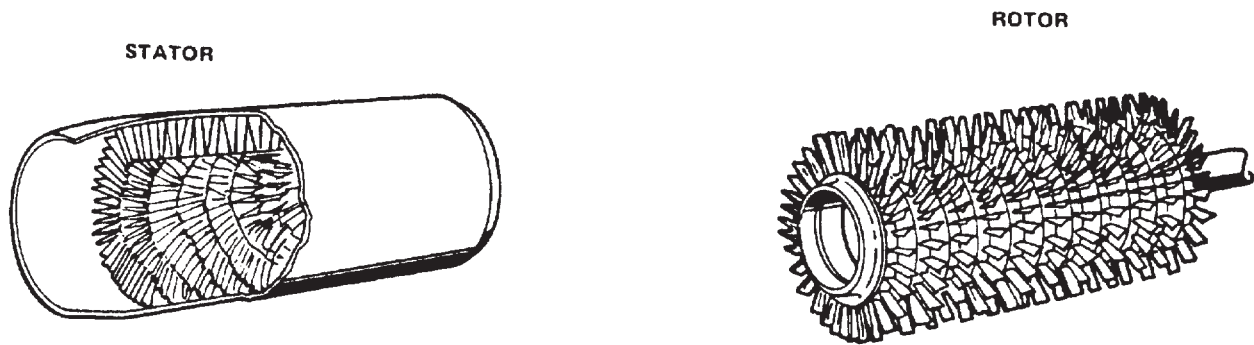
Rotor and Stator (Cutaway View) of Multistage Axial Compressor
